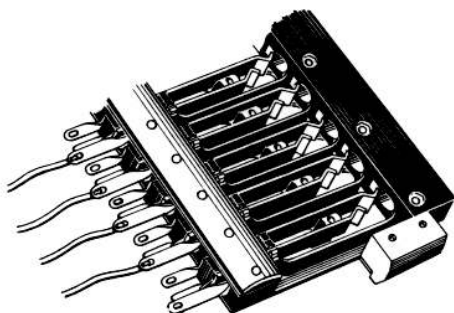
JACK OR LAMP STRIP TERMINATION.
